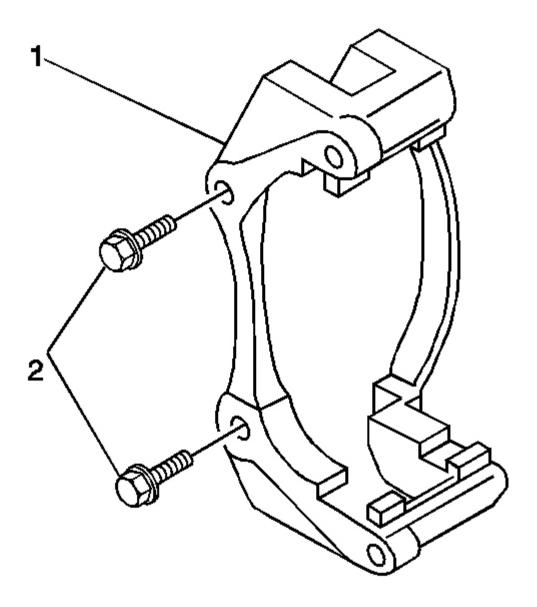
Removing/Installing Brake Caliper Bracket Courtesy of GENERAL MOTORS CORP.
